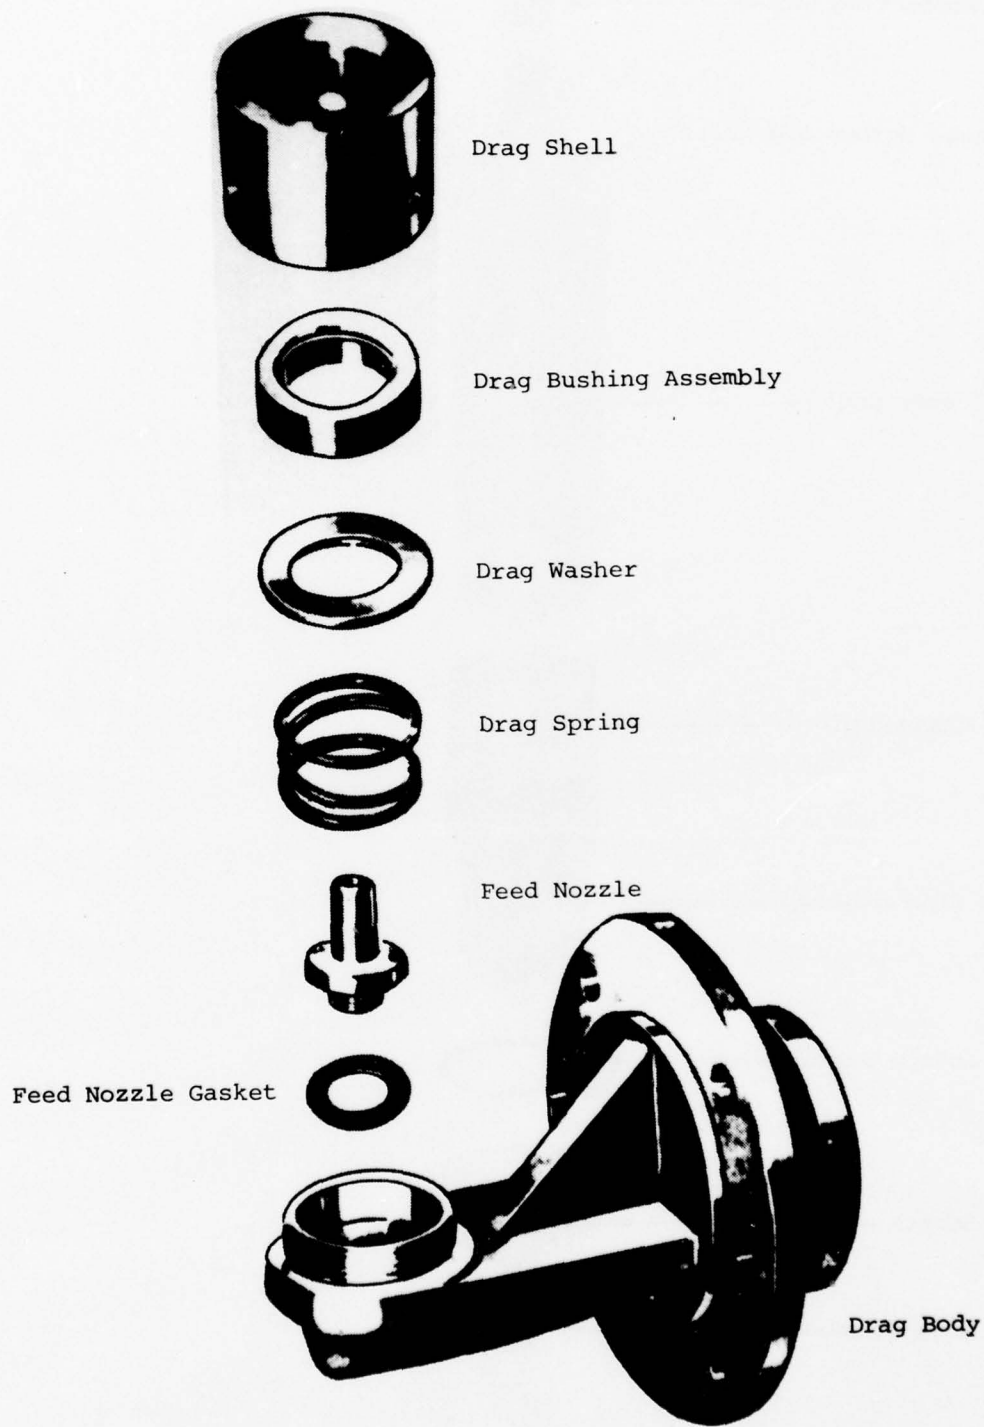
DRAG PARTS OF LUBE OIL PURIFIER (from NAVSHIPS Technical Manual 0945-003-6010, Figure 48, p. 4-15)
